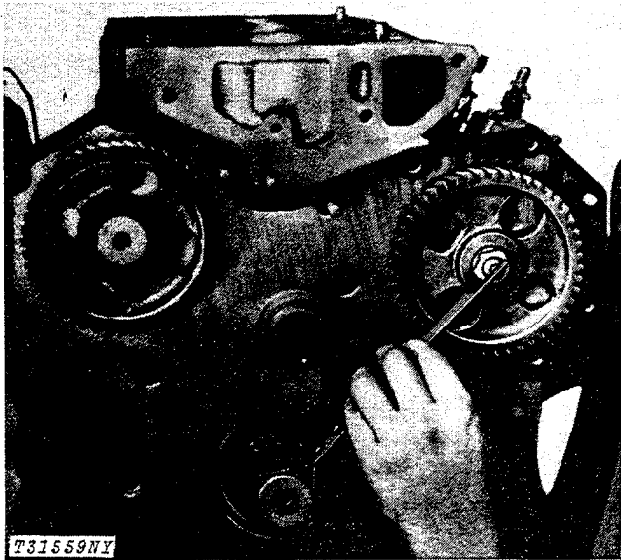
Timing the Injection Pump Gear with JD-254 Tool
